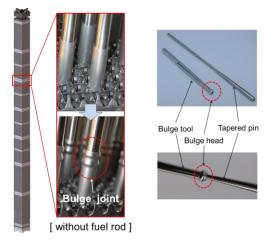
Bulge Tool and Bulge Formation in Fuel Assembly
